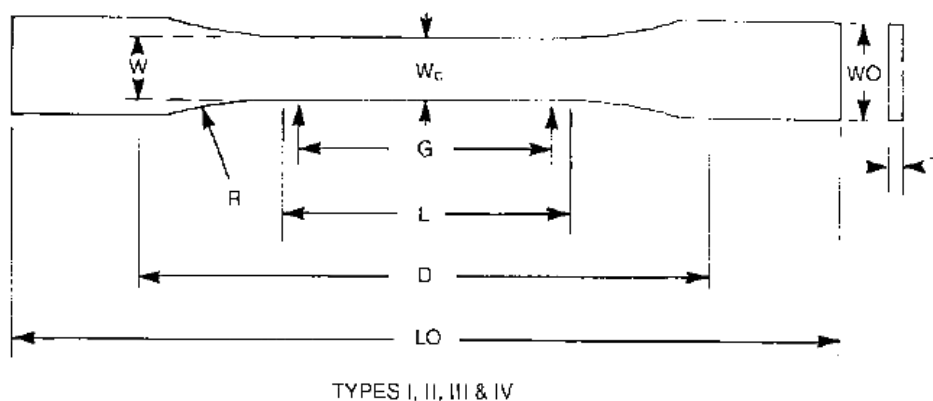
Geometry of tensile specimens (ASTM D638 [22]).
